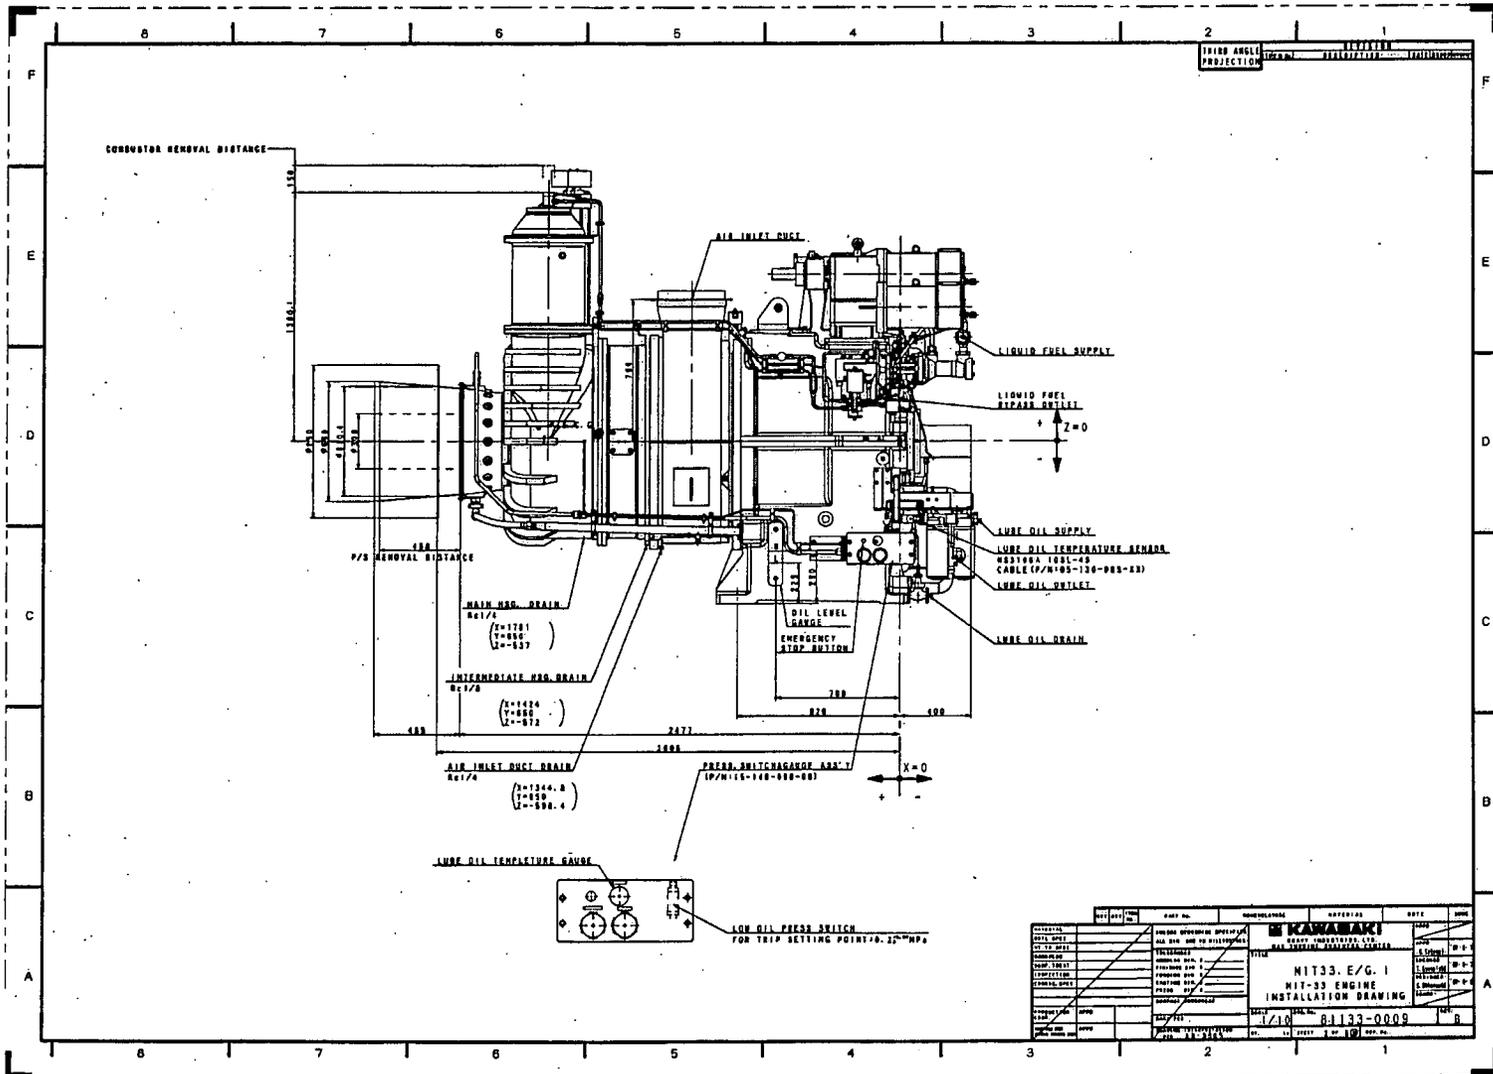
Installation Drawing of Gas Turbine Assembly (sheet 2)
